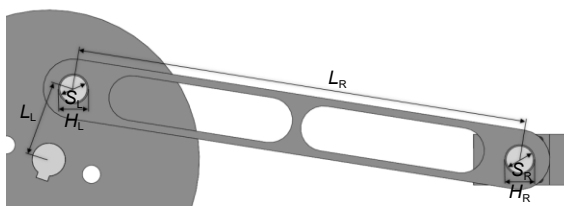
Dimension parameters of the crank-slider mechanism parts ( $L_L$  is the length of the crank, and  $L_R$  the length of the connecting rod)
